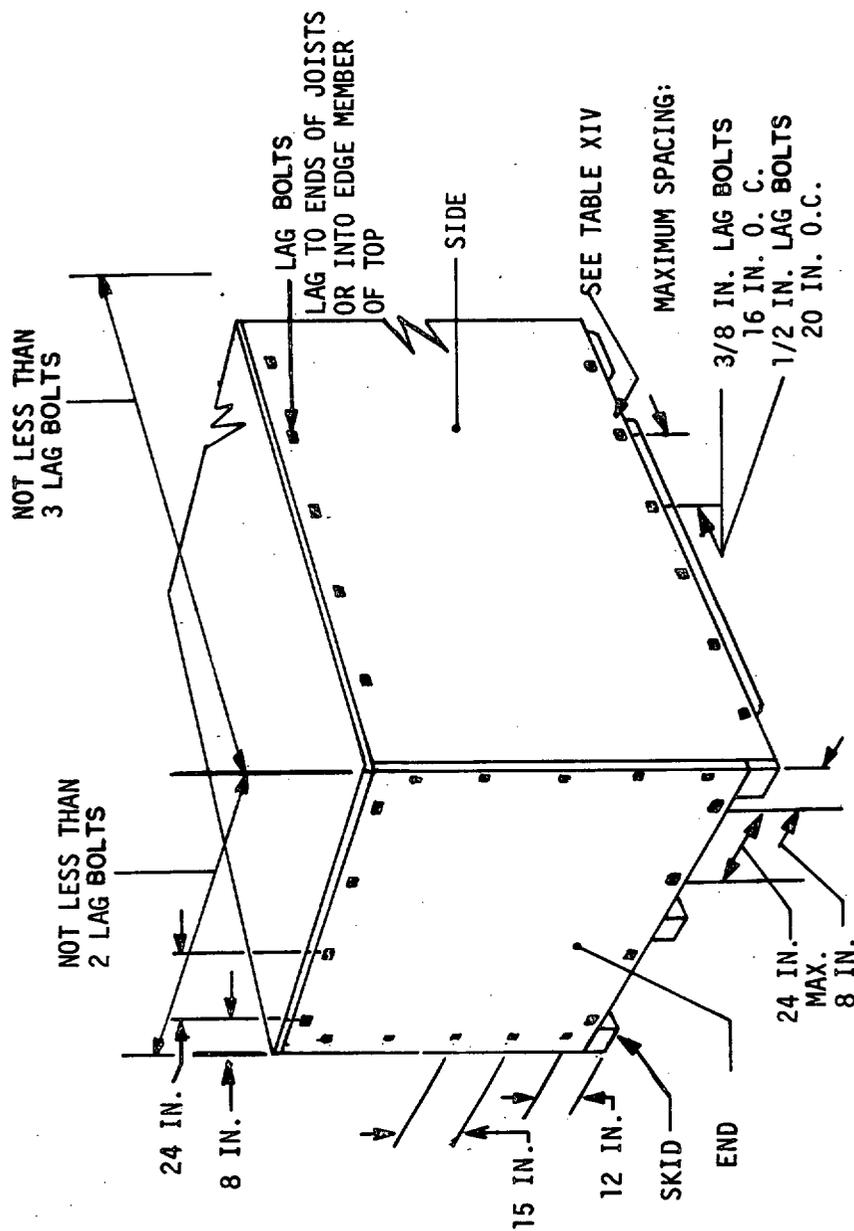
Assembly of bolted crate (lumber or plywood sheathed).
